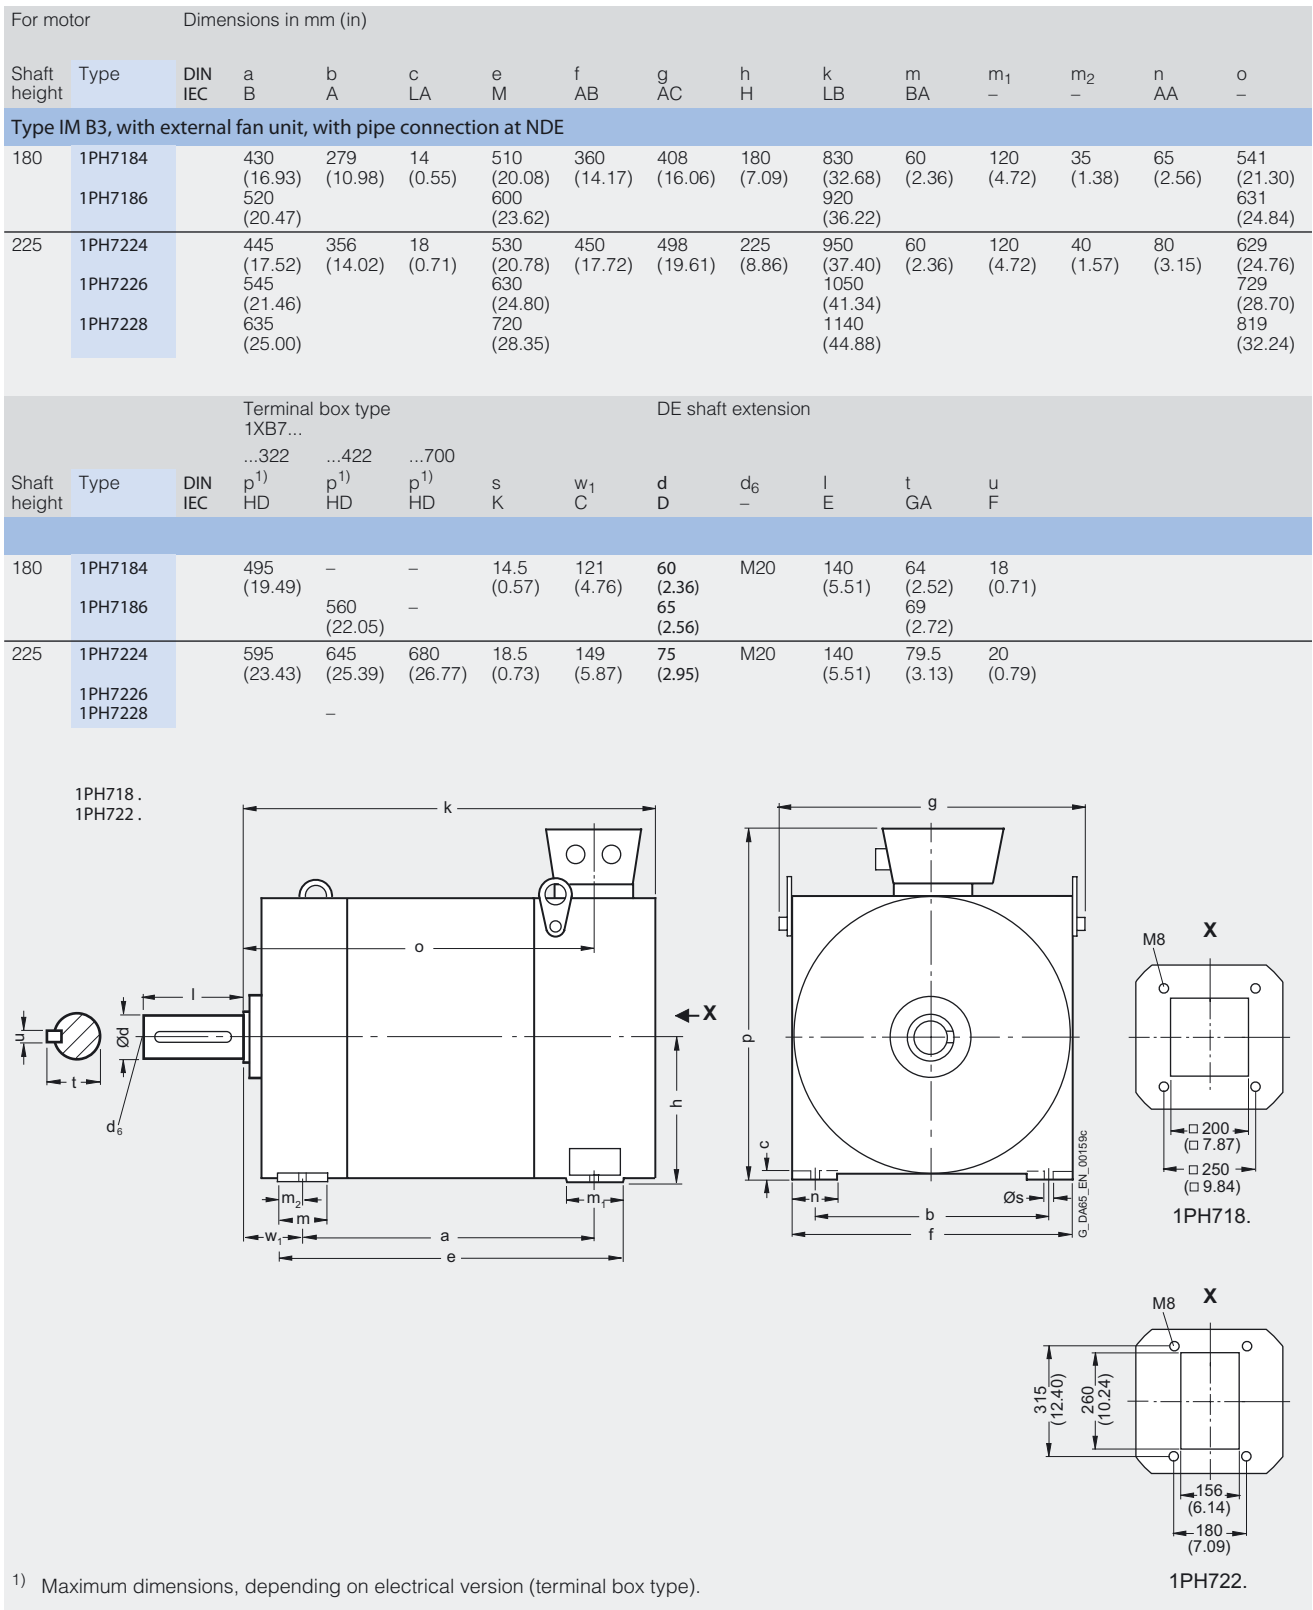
1PH7, type of construction IM B3, forced ventilation, with pipe connection, NDE
